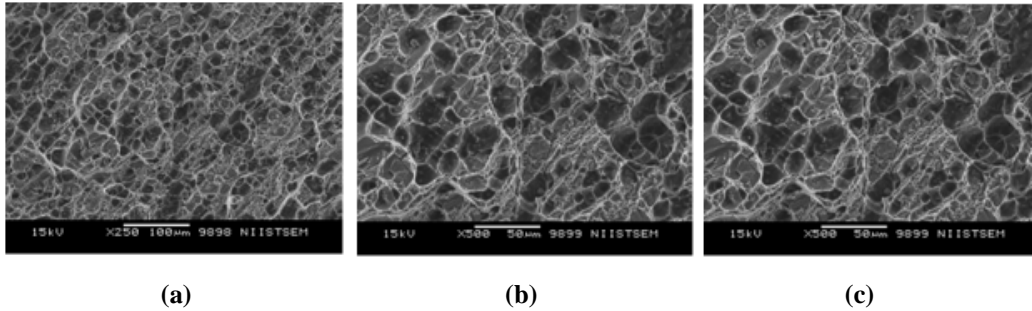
SEM Images of Fractured Face of Weld Sample (a) 250X Zoom, (b) 500X Zoom, (c) 1500X Zoom
